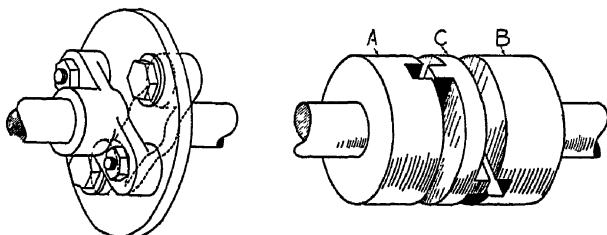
Generator drive couplings. (A) Flexible disc coupling. (B) Oldham coupling.
